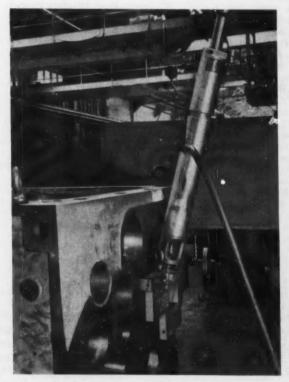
Drilling outward from inside a bearing bore, this air drill cuts a 5/8-inch angular lubrication hole in the headstock portion of a frame casting.
